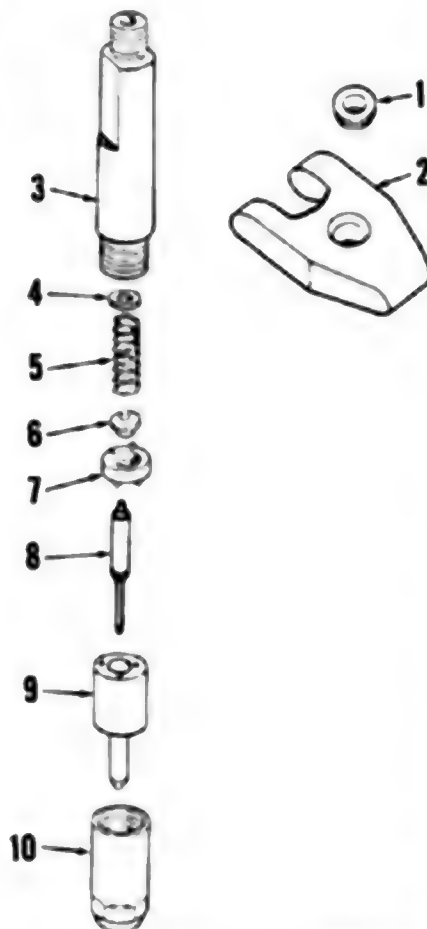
Exploded view of Robert Bosch injector nozzle assembly used on all models.
